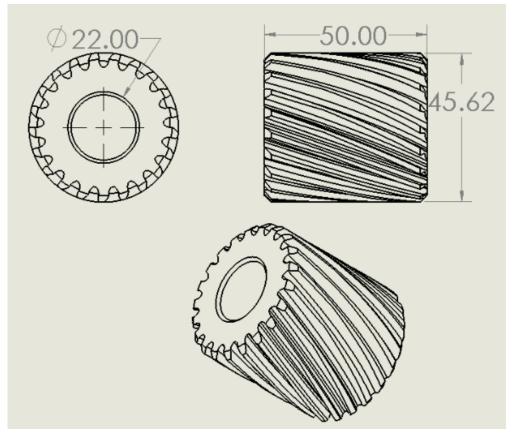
Revised Automatic String wrapper dimensions drawing in mm
